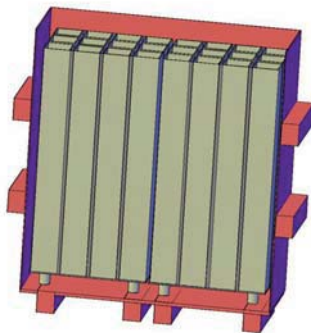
Detail of the 2 free-standing racks juxtaposed inside the pool.
